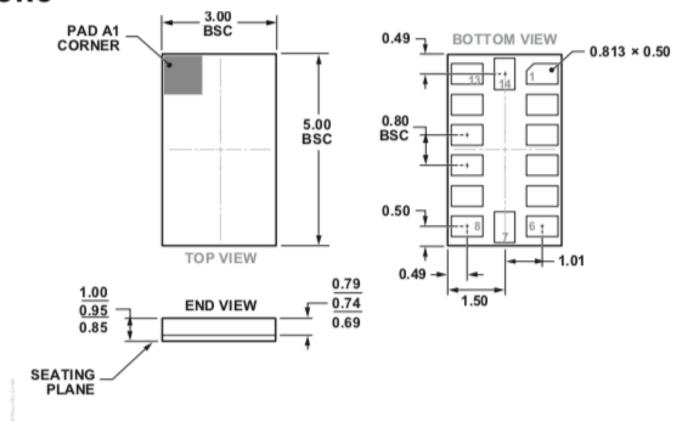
14-Terminal Land Grid Array [LGA] (CC-14-1) Solder Terminations Finish Is Au over Ni Dimensions shown in millimeters
